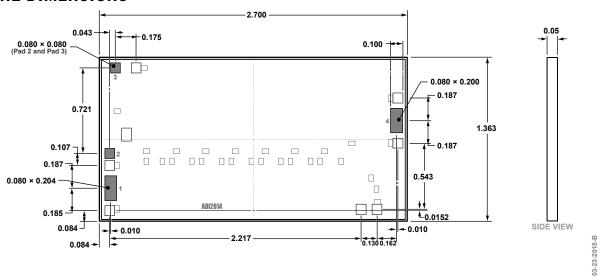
4-Pad Bare Die [CHIP] (C-4-3) Dimensions shown in millimeters
